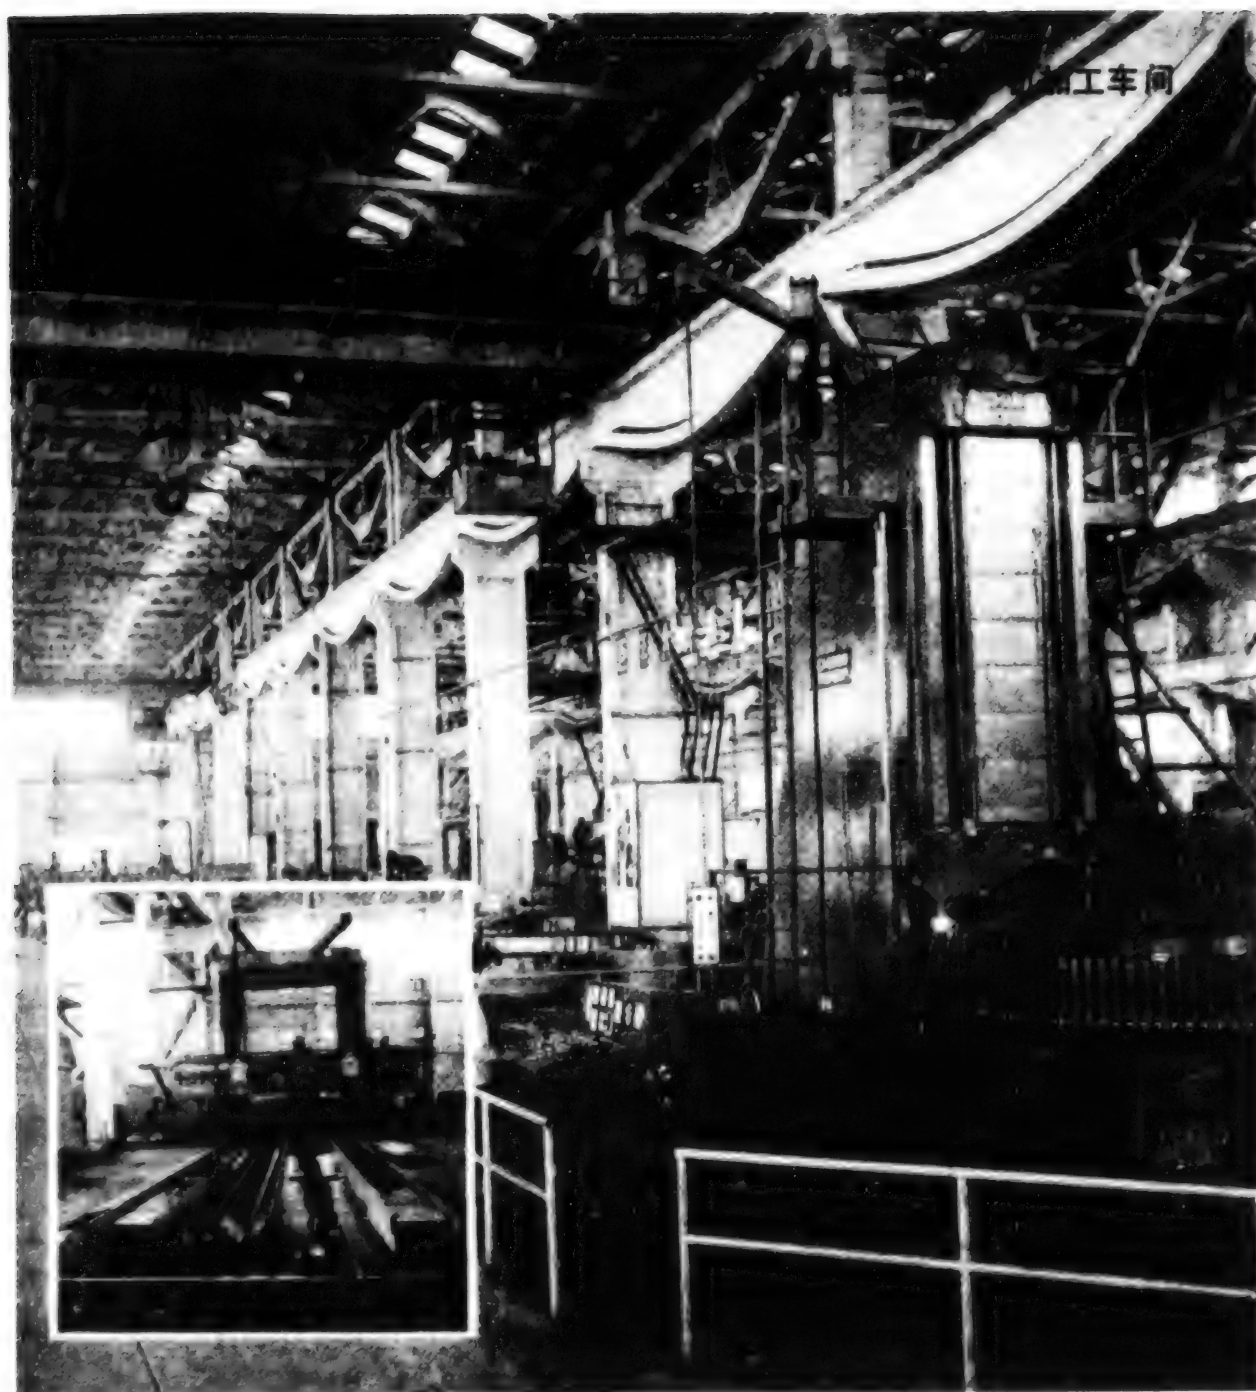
Photo of a machine shop of Jinan Machine Tool Plant No 2 in Shandong
